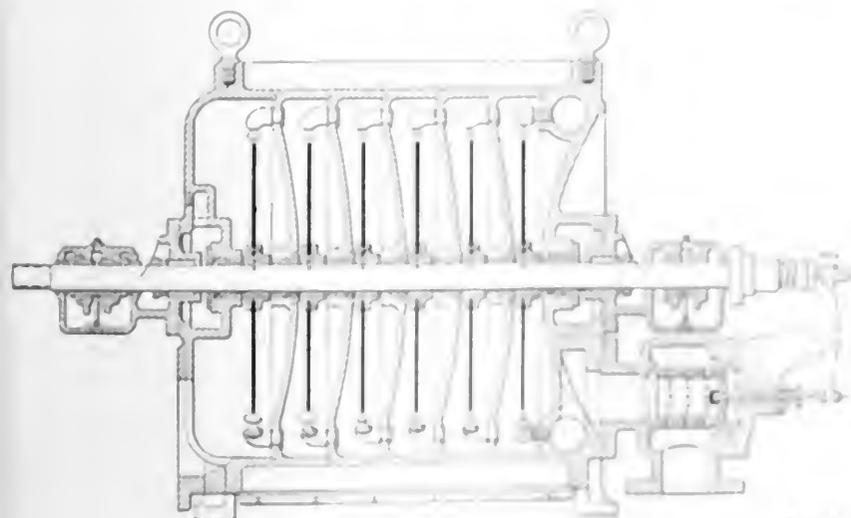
SECTIONAL VIEW OF KERR TURBINE 18-INCH
